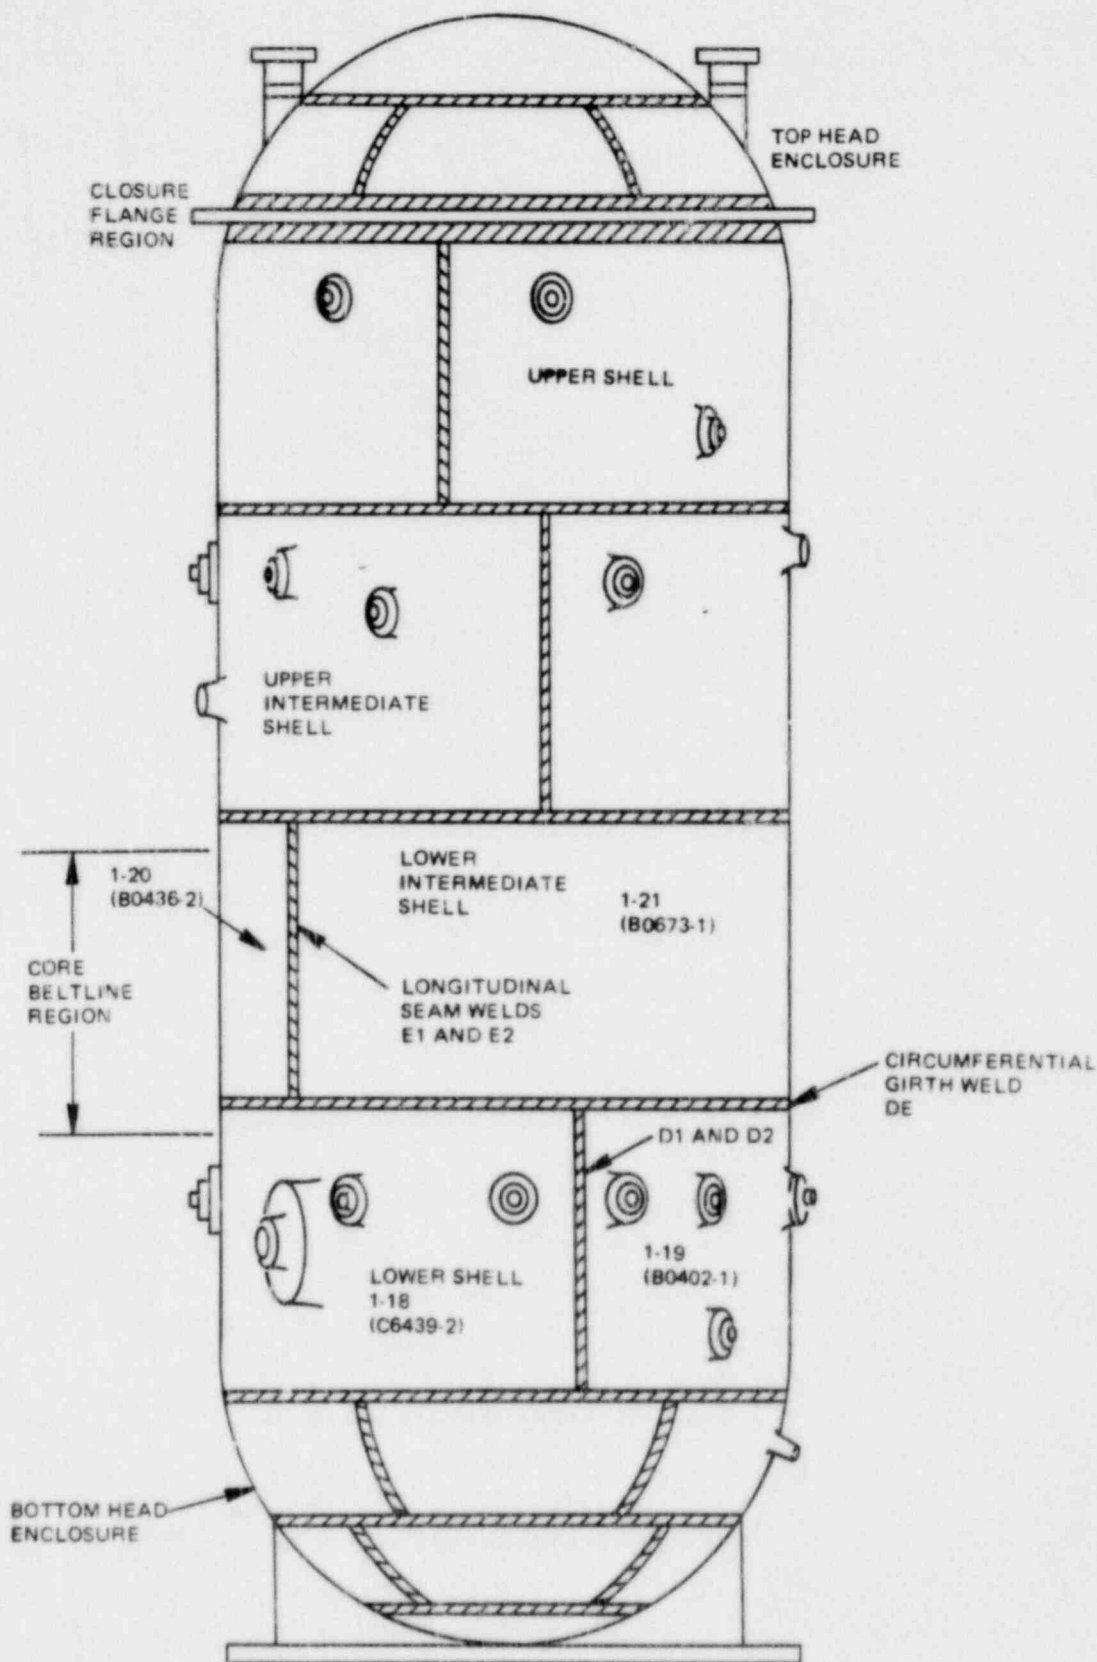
Schematic of the RPV Showing Arrangement of Vessel Plates and Welds
